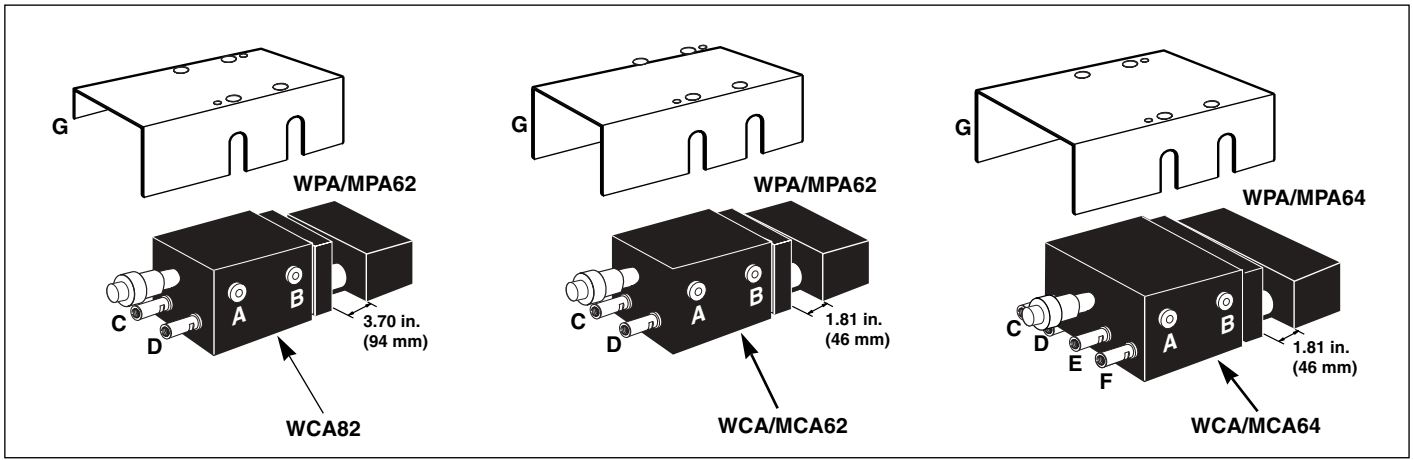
, Set-up and Mounting of Auto Coupler without Alignment Tool
